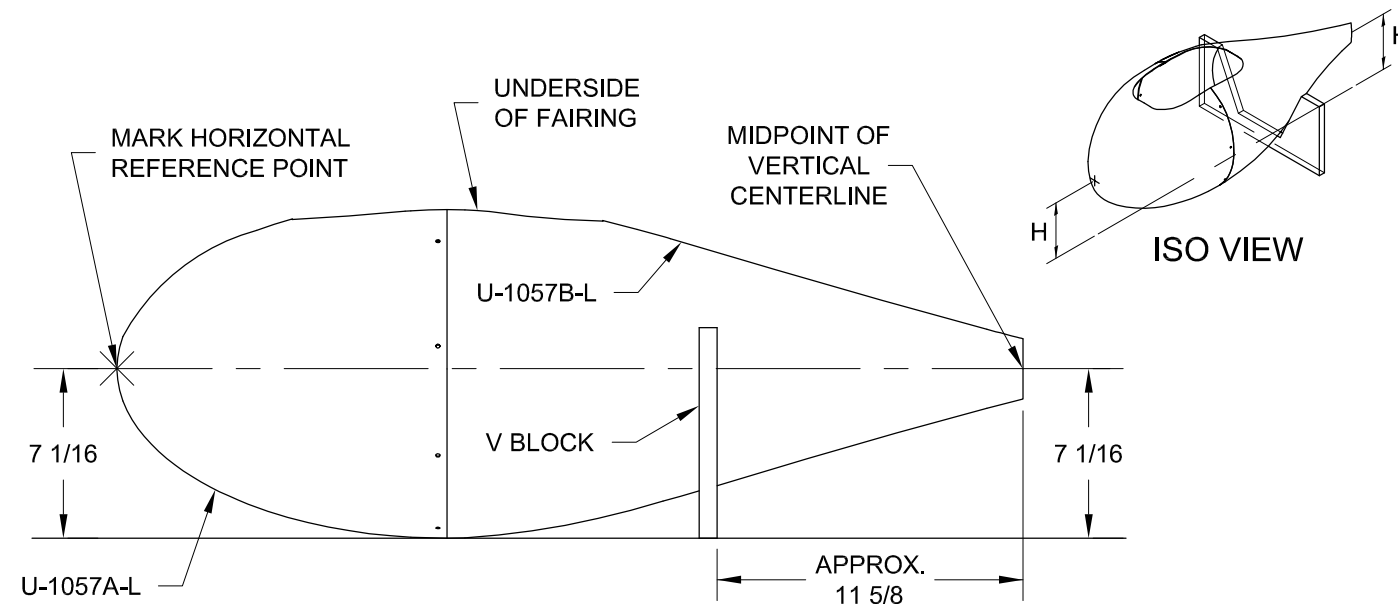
SHIM MAIN WHEEL FAIRING BRACKET
